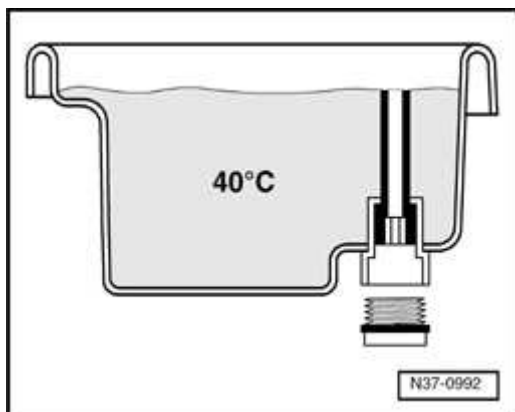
Example Of Filler Tube As It Is Installed In Transmissions
